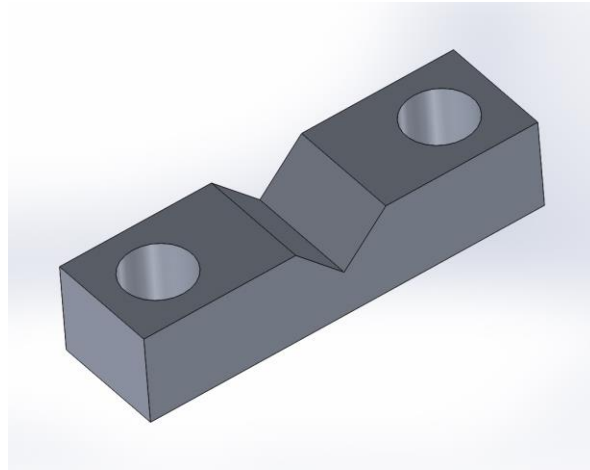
Top Mirror Hinge Assembly: Top Clamp
